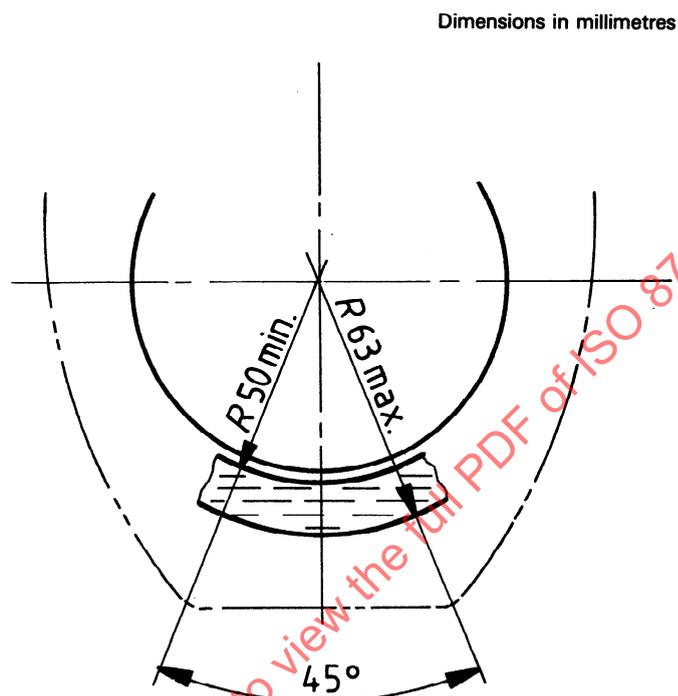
Location of lubricating oil outlet outside the centring shoulder
